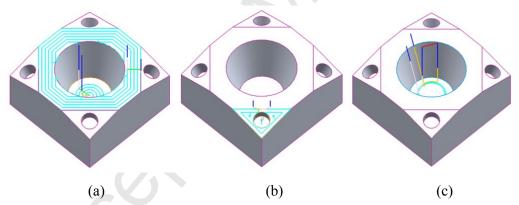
The cyan lines represent tool paths of (a) three-axis; (b) three-plus-two axis; (c) five-axis machining
